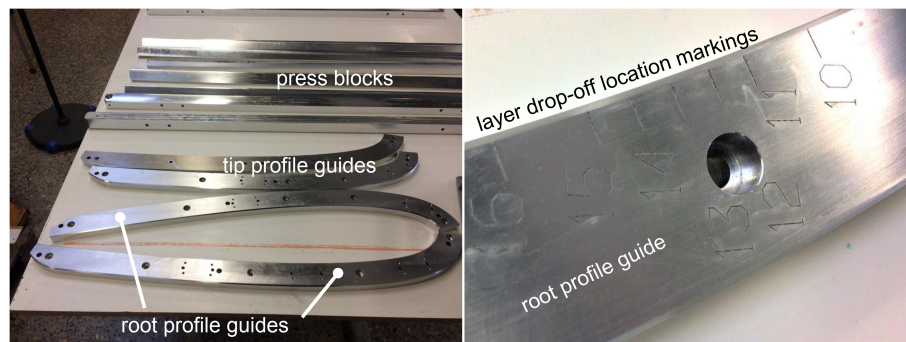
Machined press blocks and profile guides showing thickness-tailoring layer drop-off markings.
